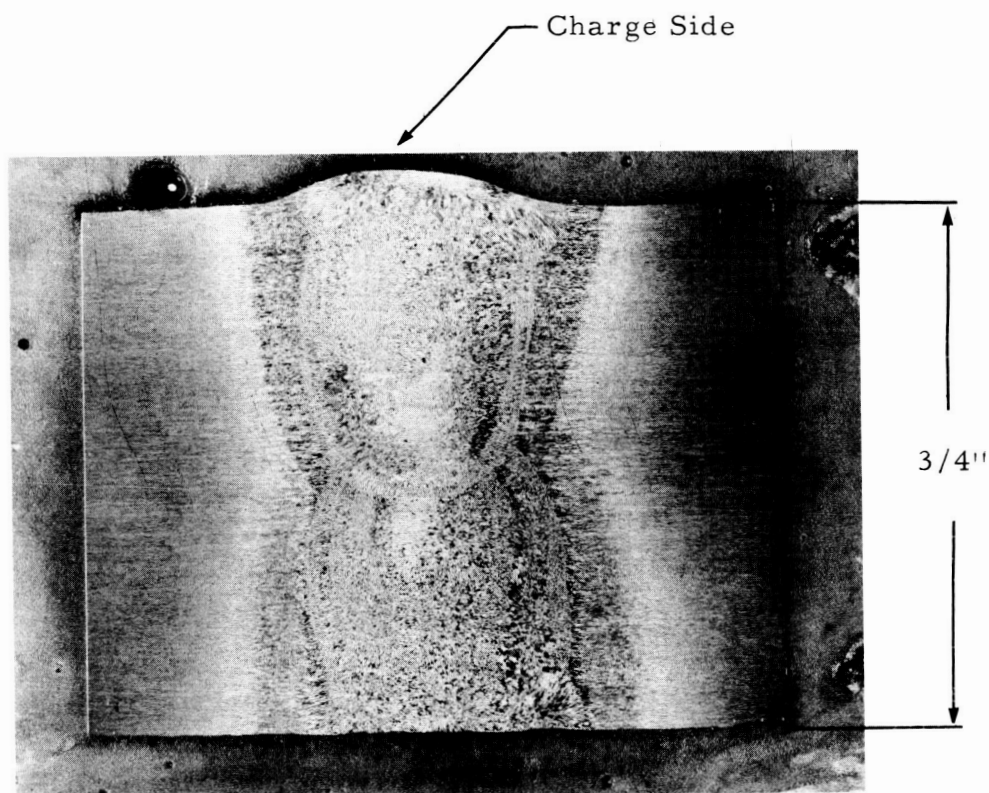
CROSS-SECTION OF THE WELD FROM TEST PANEL NO. 25. Panel was fabricated from $3/4$ inch thick 2219-T87 aluminum plate. A four pound charge of pentolite was fired above the panel. Note that the weld crown at the bottom surface was flattened out when the panel was forced against the steel base plate. This gross plastic deformation resulted in the refinement of the coarse columnar grain structure found in the crown area of the joint.
